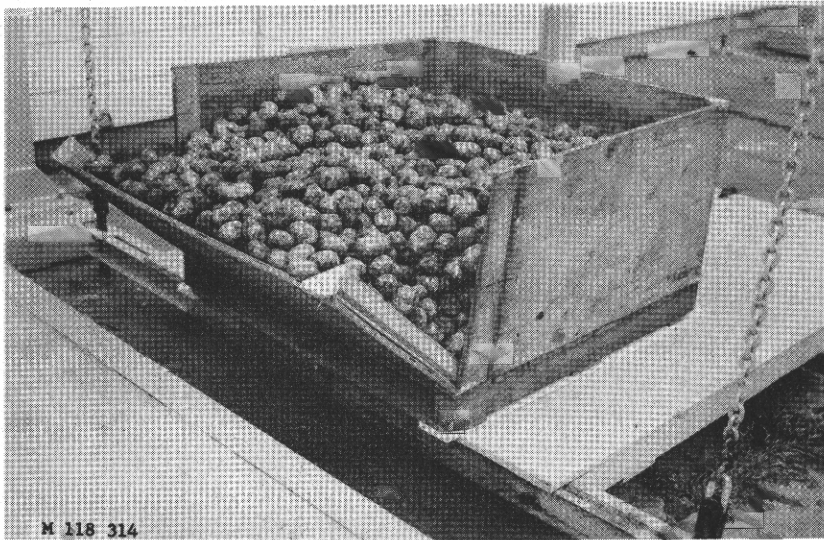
Bin pallet K after the pendulum-impact test. The triangular assembly plate at the top corners failed to hold the end panel to the sides.
